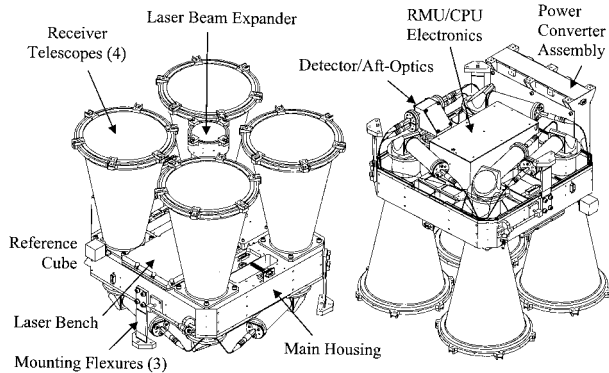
MLA assembly drawing: left, top view; right, bottom view.
